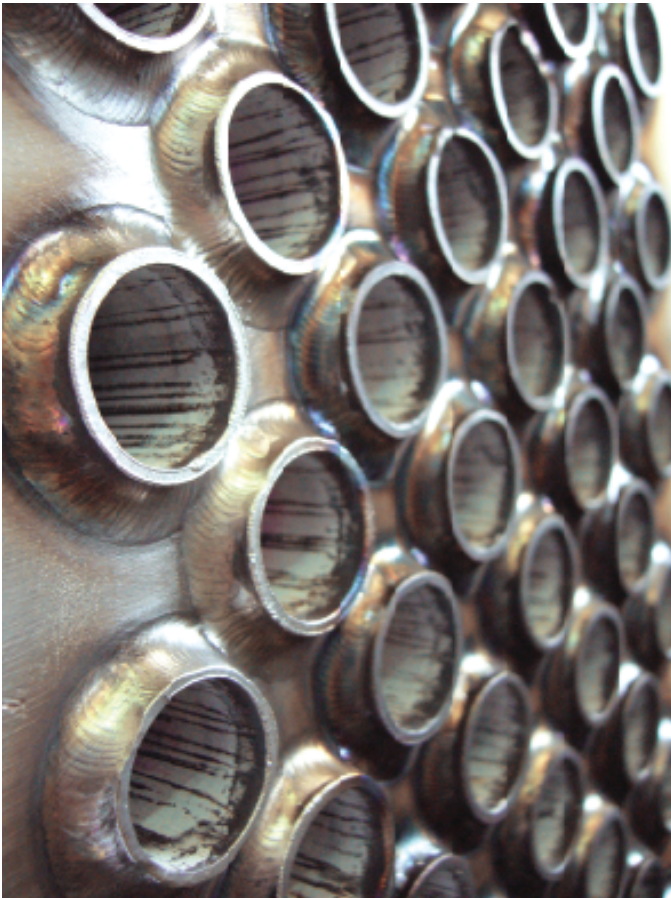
The challenge of producing consistent, repetitive welds becomes greater if operator fatigue becomes a factor.
